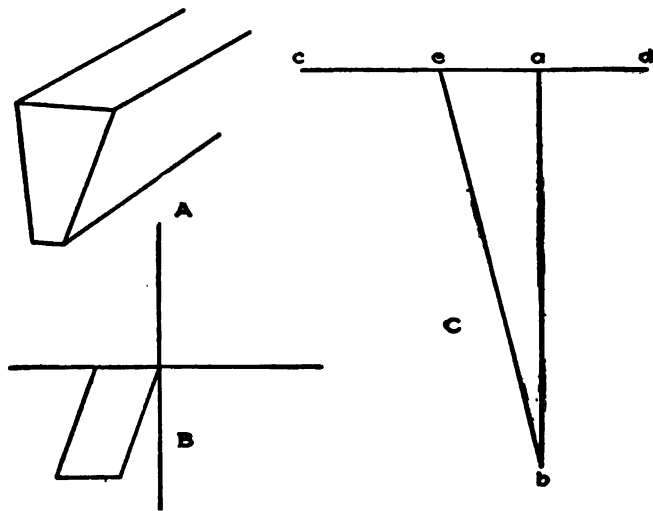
ANGLES FOR SQUARE THREADING TOOLS
